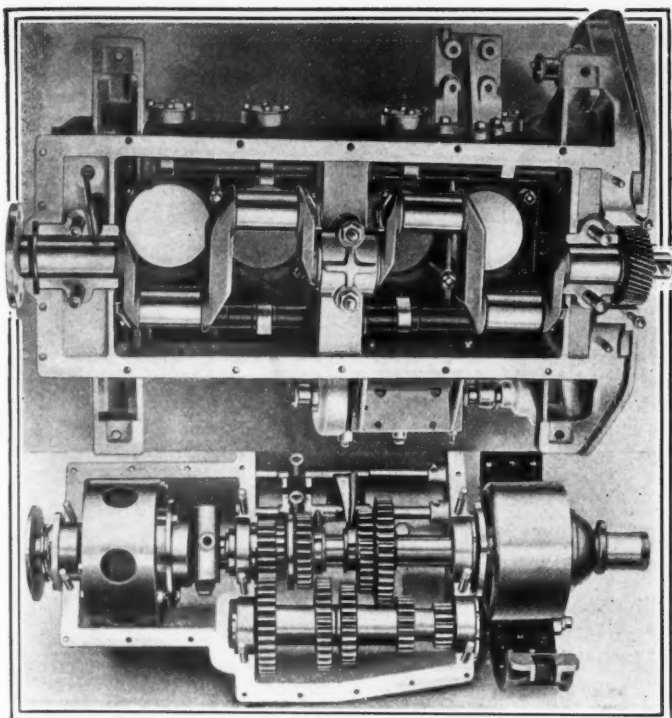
Mercer crankcase and gearset. At the top is shown the upper half of the Mercer crankcase looking into it from the lower side. The crankshaft bearings, it will be seen, are supported from bridges across the crankcase and the main bearing caps are held in place by two bolts. These are nickel steel and are locked by French locks consisting of a strip of metal passing over two adjacent bolts and bent up around the nuts. The lower part of this view shows the gearset and clutch, which are contained in the same housing. The clutch has forty-four steel disks, which run in oil and which are concave. The gearset has four speeds, and the shafts each have four splines
